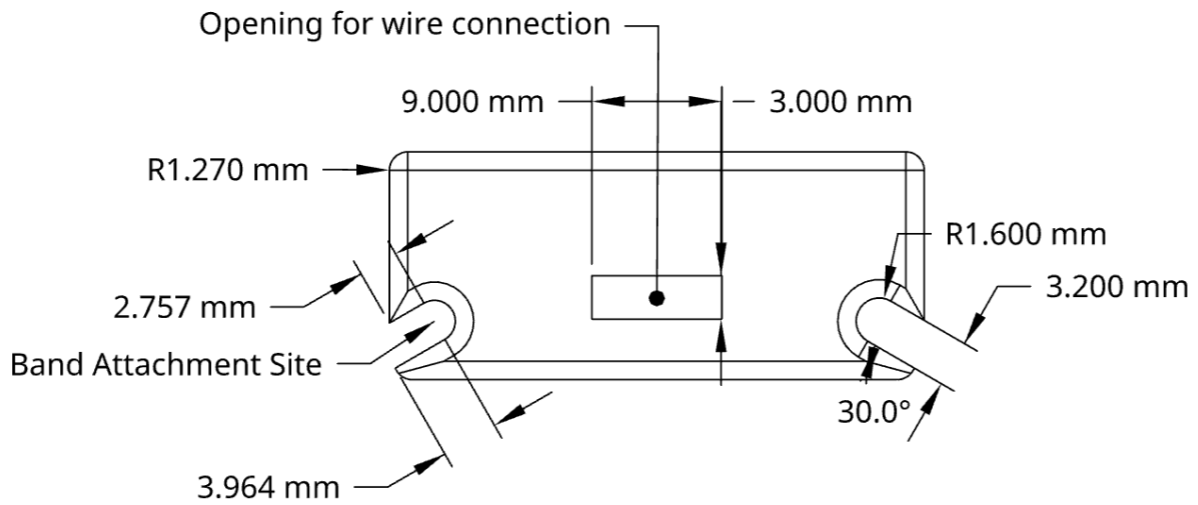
CAD Drawing of Front wall of Case with Dimensions
